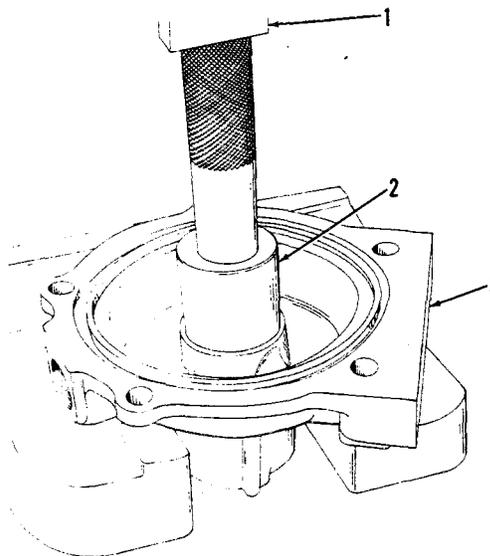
INSTALLING SEAL ASSEMBLY (T-51202)
